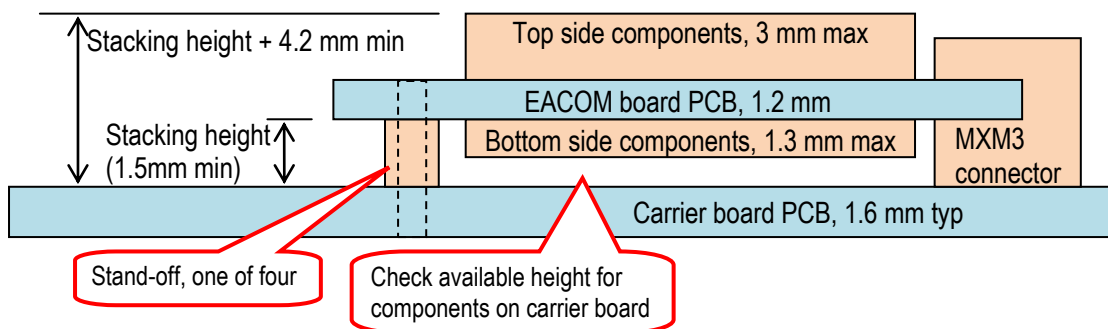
COM Board Mounting in MXM3 Connector, Stacking Height
